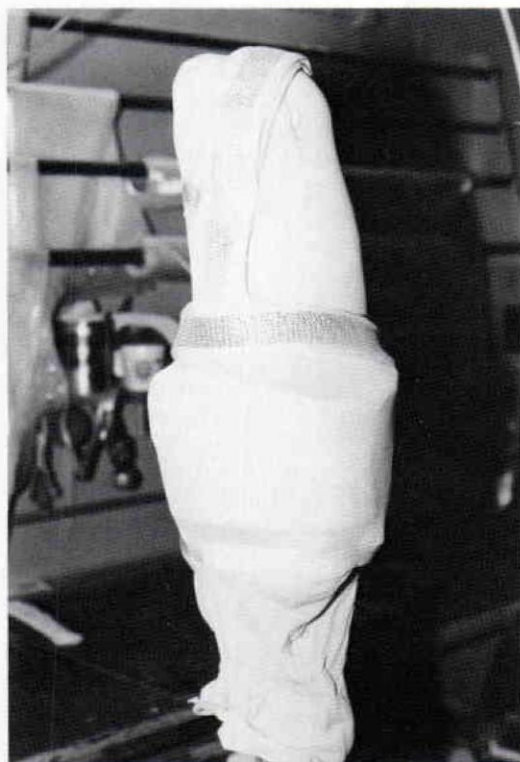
The fiberglass and carbon fibre lay-up for the socket frame.
